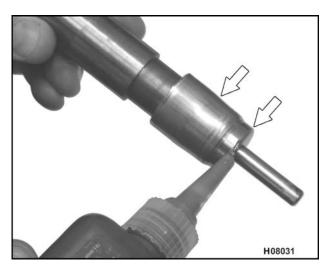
Applying Loctite® 620 sealant to fuel injector sleeve
